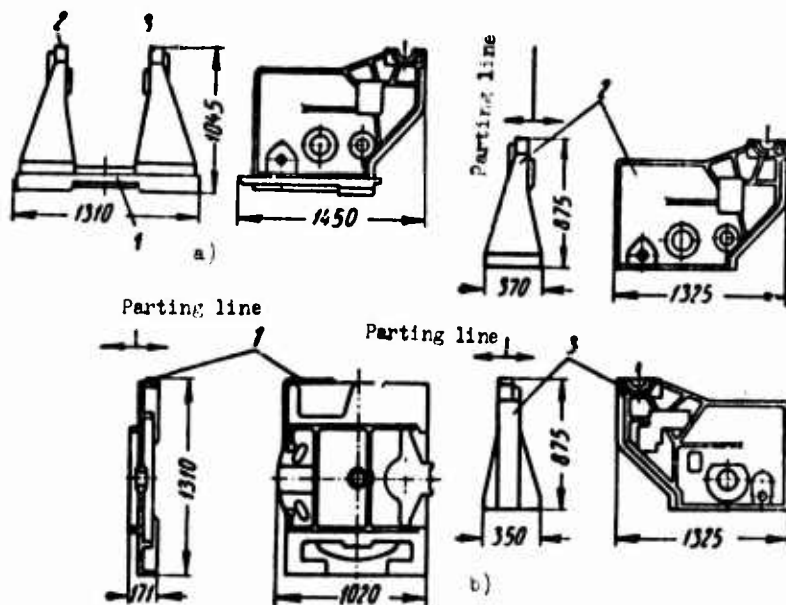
Cast construction: a) integral casting; b) dismembered into three parts 1, 2 and 3.
